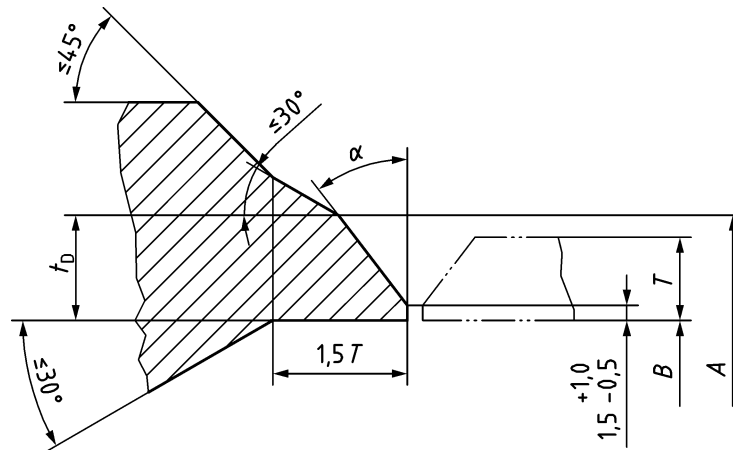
Single-V butt weld end connection to pipe of wall thickness $4 \text{ mm} < T \leq 22 \text{ mm}$
